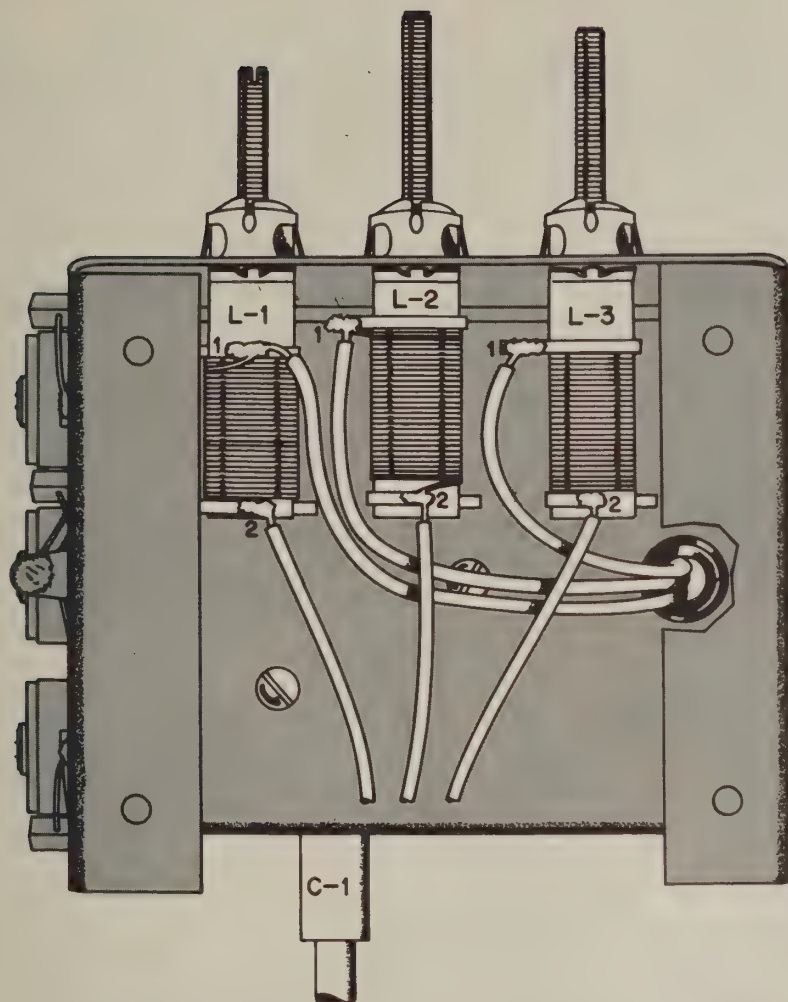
SECOND WIRING ON THE TUNING CHASSIS
